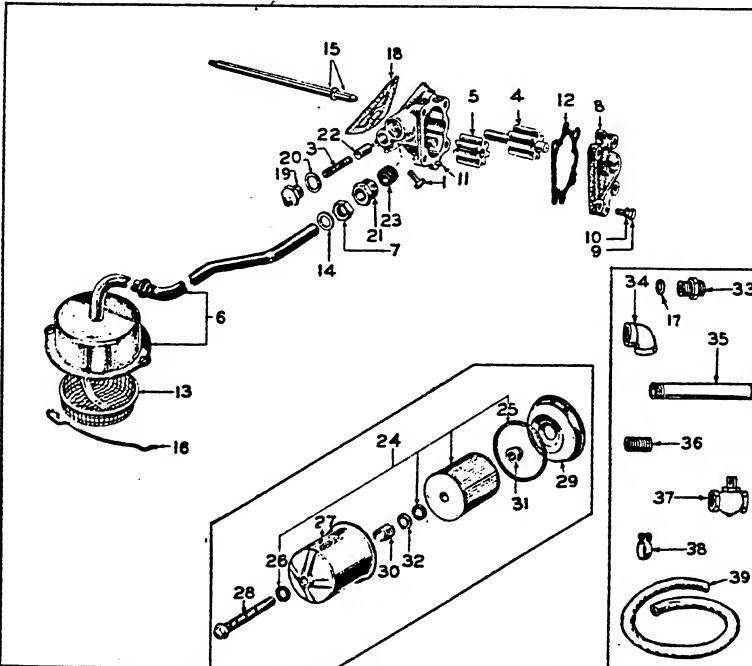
OIL PUMP & OIL FILTER GROUP
